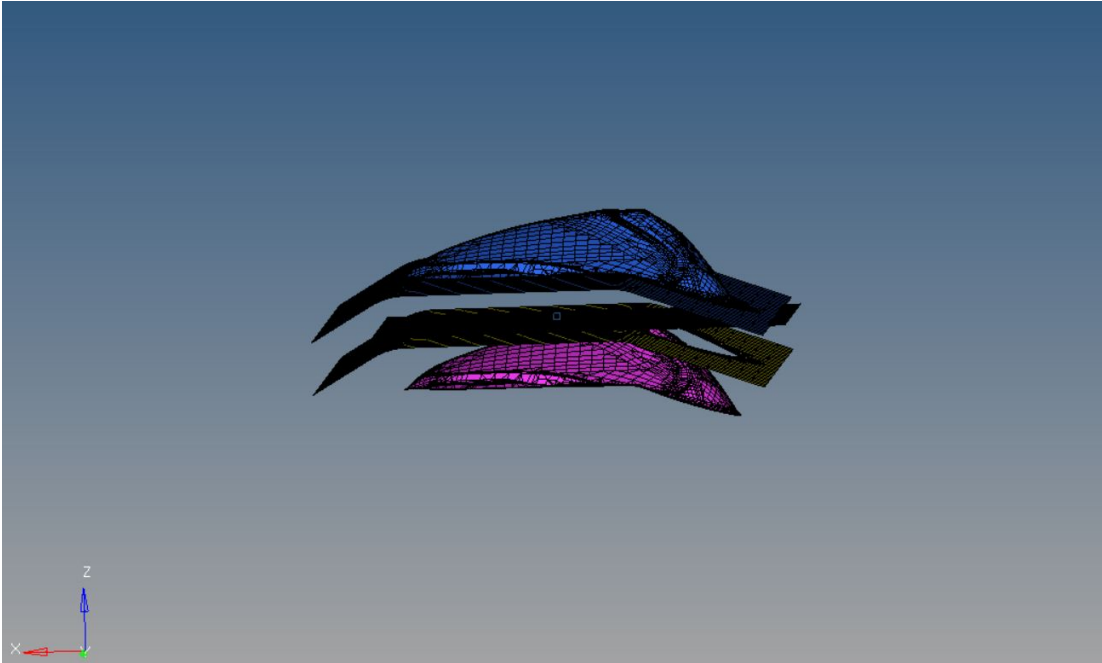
From upside (1) Die (2) Blank (3) Binder (4 )Punch
